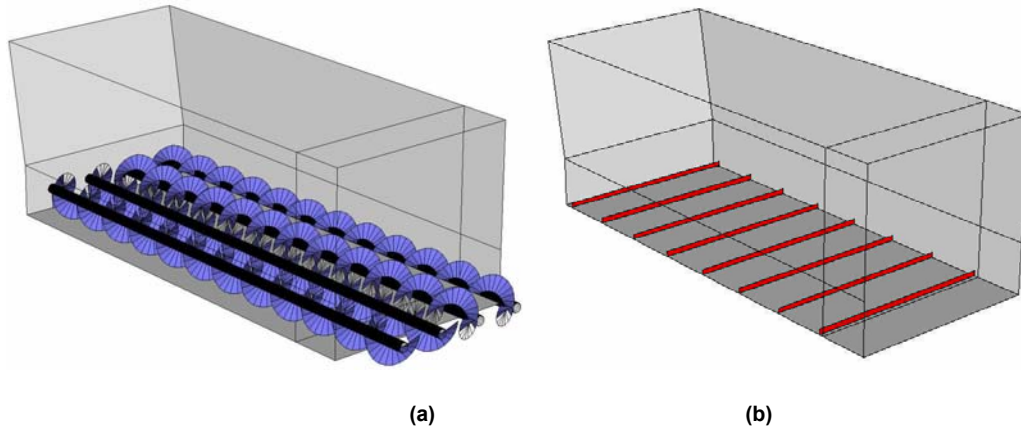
Prototype land applicator with (a) 4-auger and (b) scraper conveying systems.
